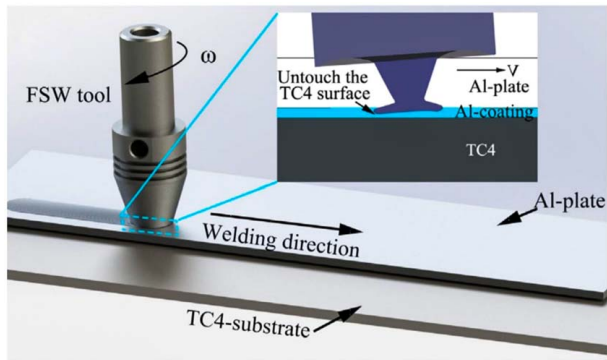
The lap welding friction stir technique studied in Ref. [118] (Reprinted with permission from Elsevier © 2017)
